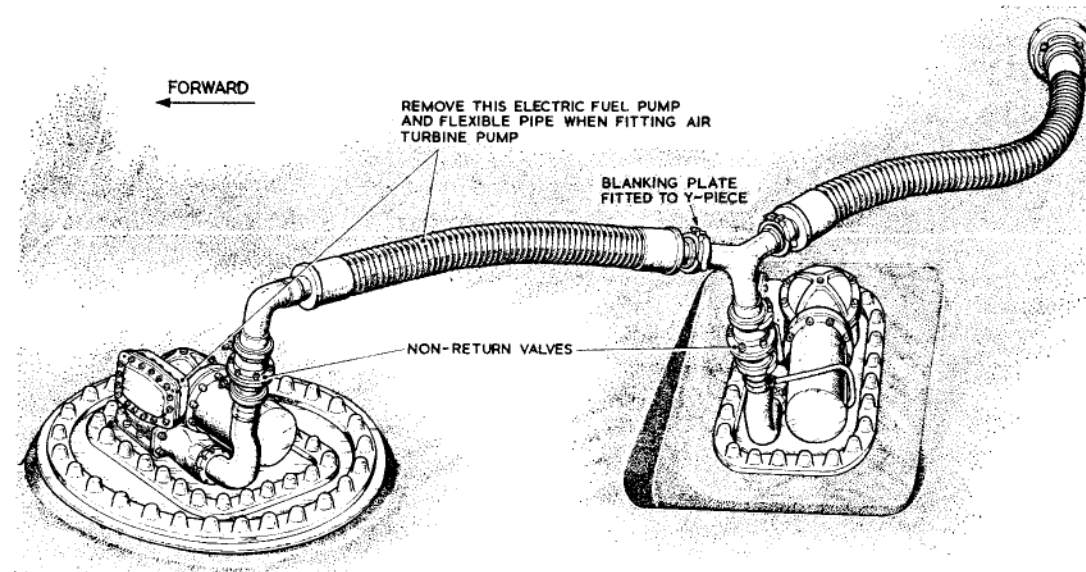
Transfer tank starboard cell fuel pump assembly — post-Mod.2443
